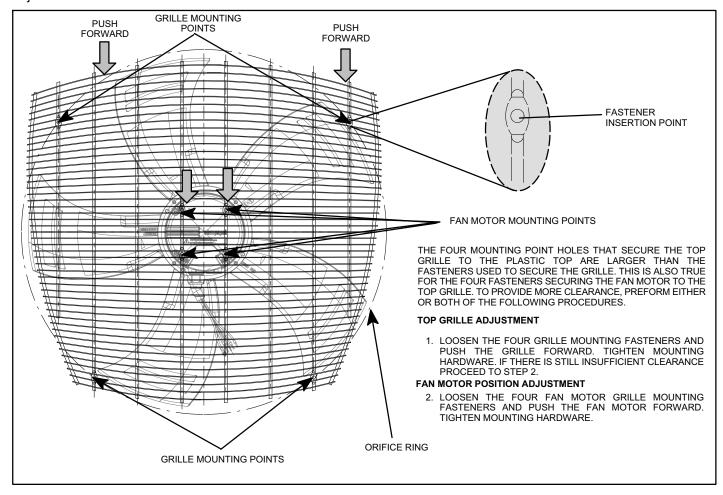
Fan Blade Clearance Adjustment — XC21-XXX-230-05 AND LATER
